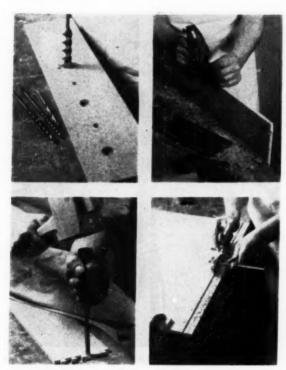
as shown, bartrev board can be drilled, planed, chiseled, and rabbeted with ordinary woodworking tools
